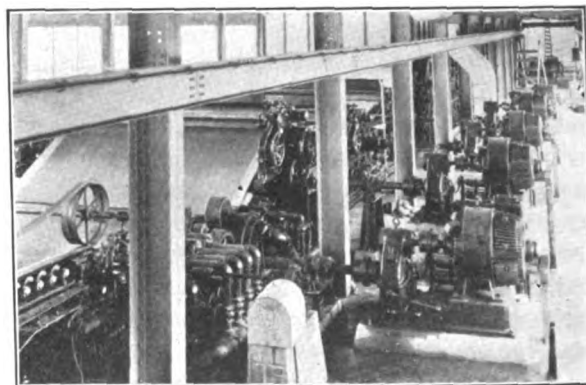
SECTIONAL PAPER MACHINE DRIVE INSTALLATION OF ELECTRICAL DIFFERENTIAL TYPE, FIELD CONTROL, SPEED REGULATOR SYSTEMS
